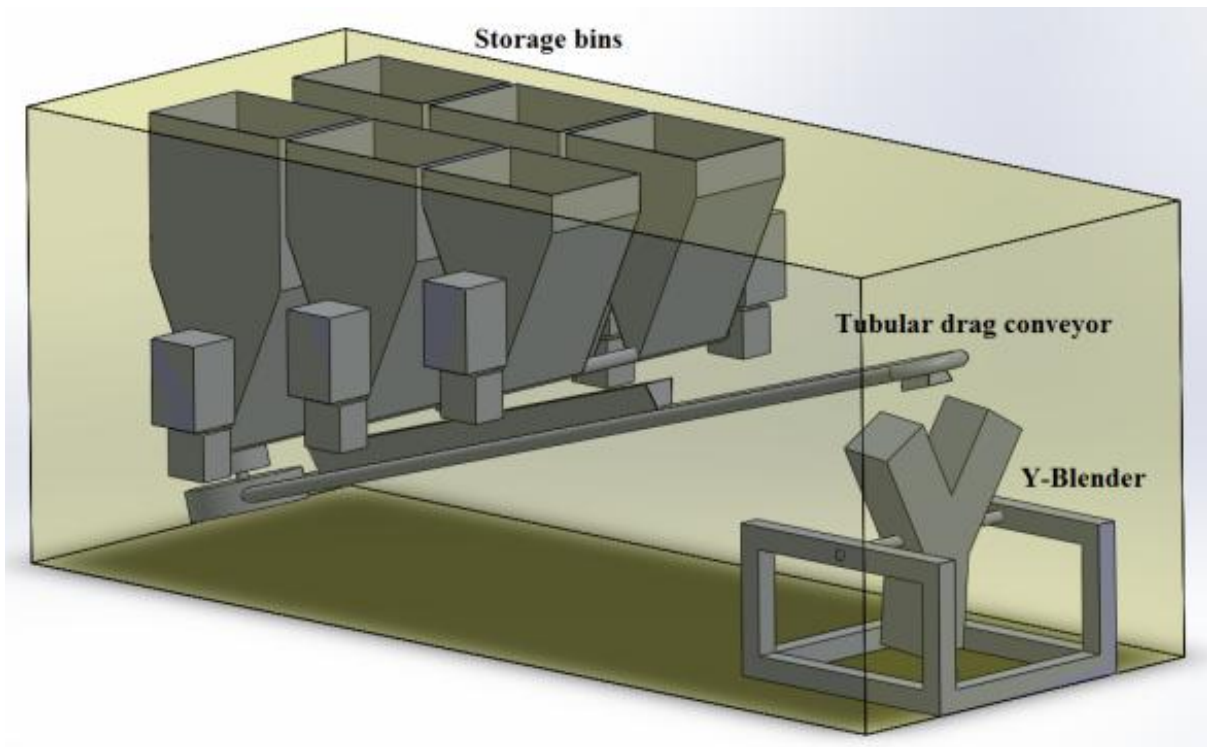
Layout of proposed mixing system within a container (Dimensions: L = 5900mm; H = 2400mm; W = 2350mm), showing six feeder bins capable of unloading material onto a tubular drag conveyor. The tubular drag conveyor subsequently feeds the material to a Y-blender.
